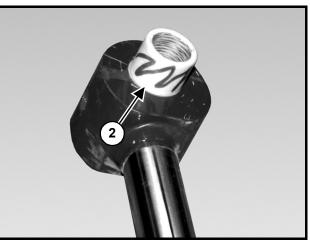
Apply LOCTITE and Install Bushings Into Rod End
